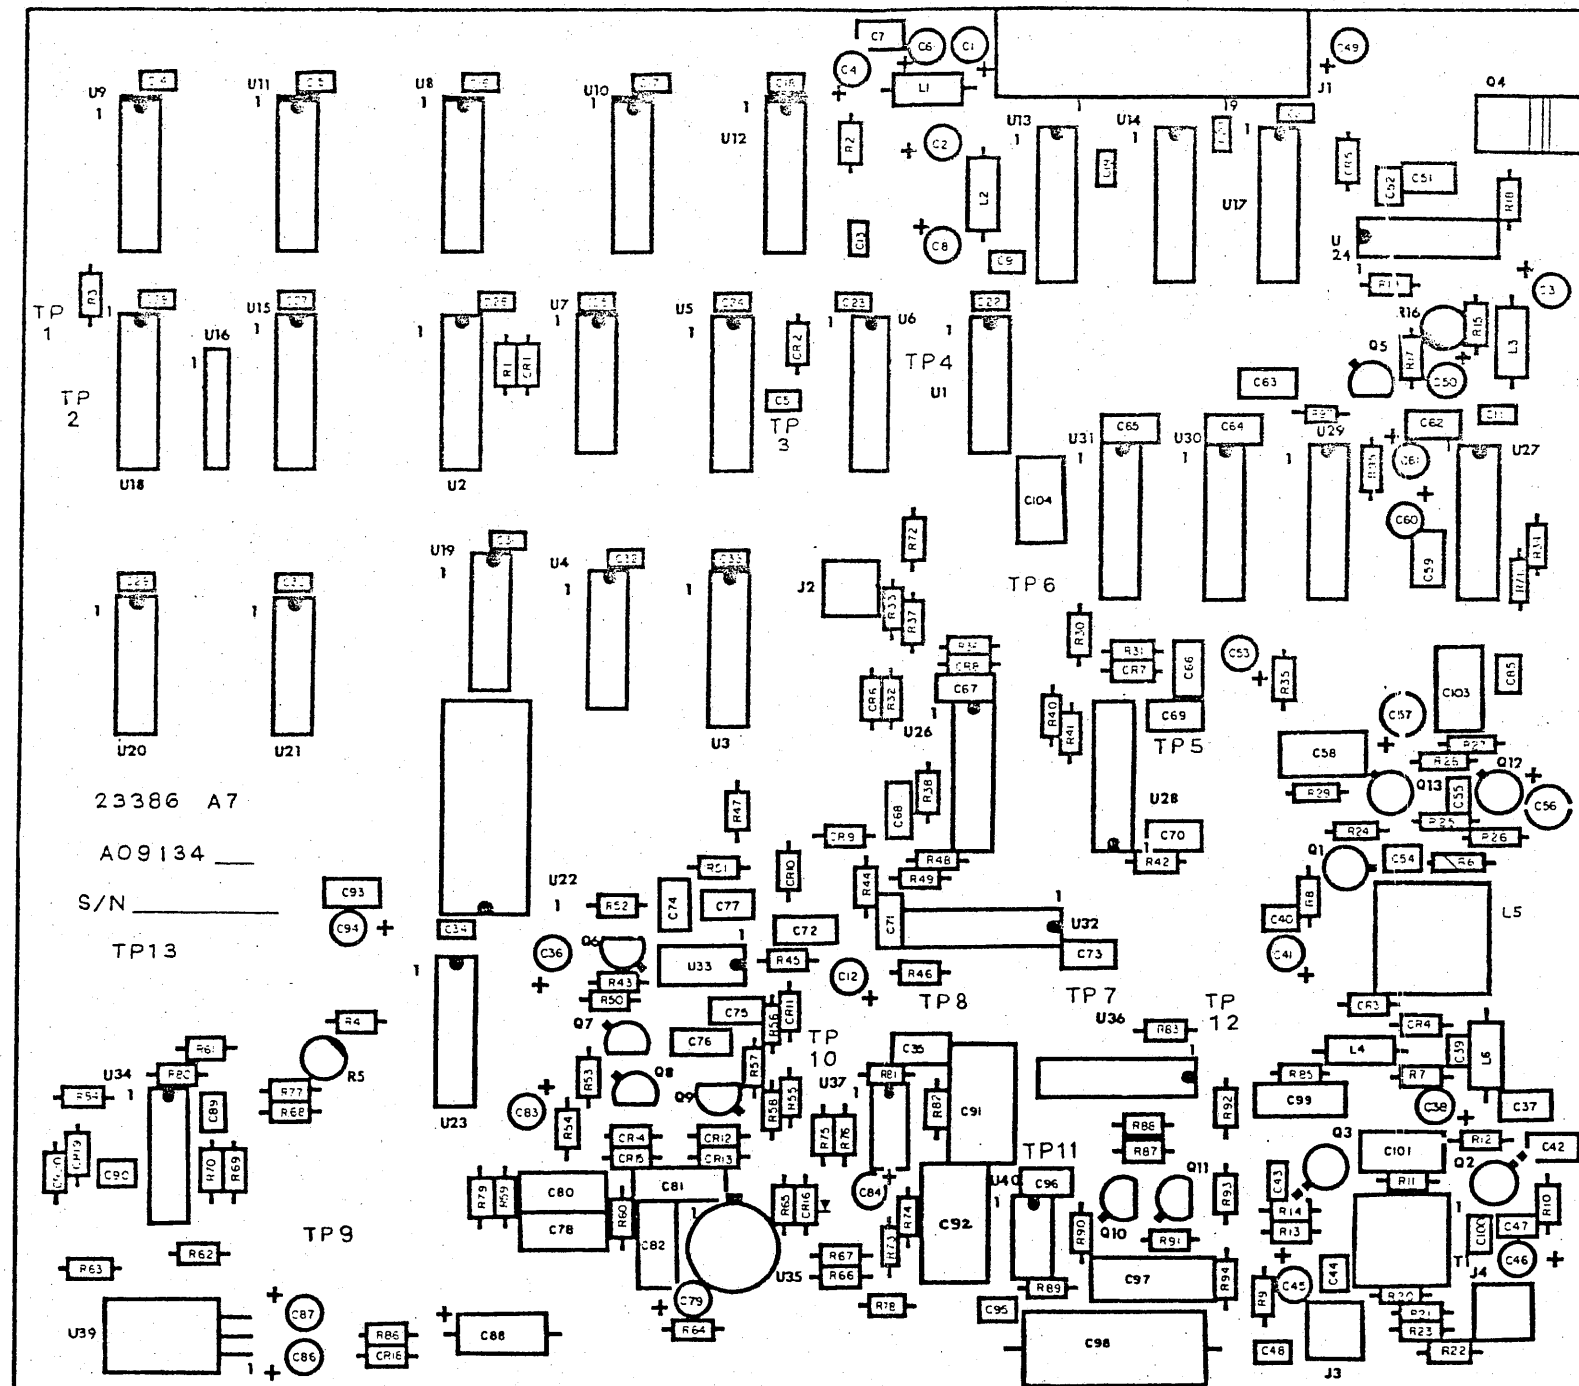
1st LO Synthesizer Circuit Card Assembly (A7) Component Location Diagram (09134)
